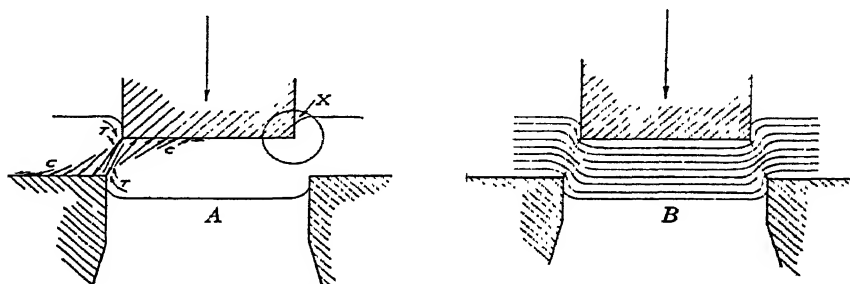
SECTIONS OF A BLANK DURING SHEARING.
